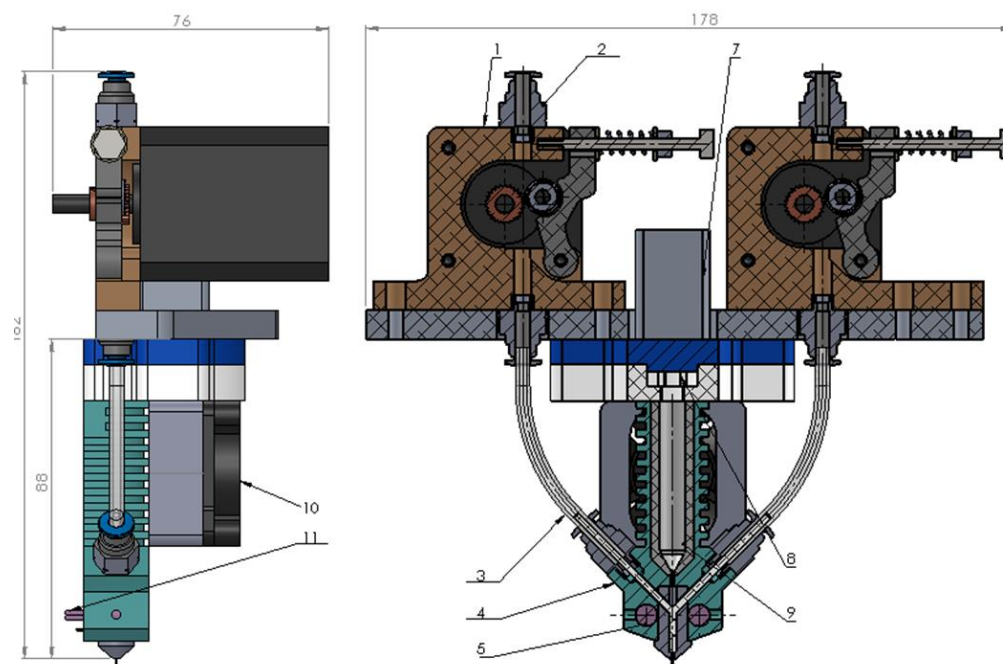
Schematic Drawing of an Extrusion Head for use in FDM Technology
